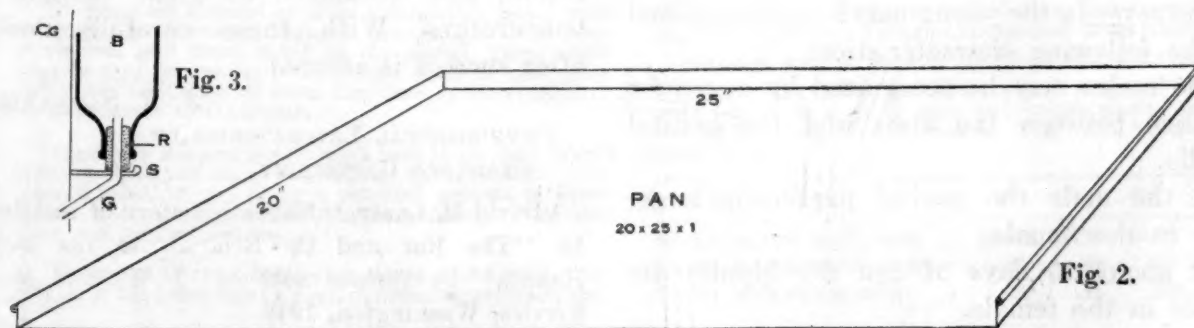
Galvanized iron bottom, giving dimensions and plan of construction.
